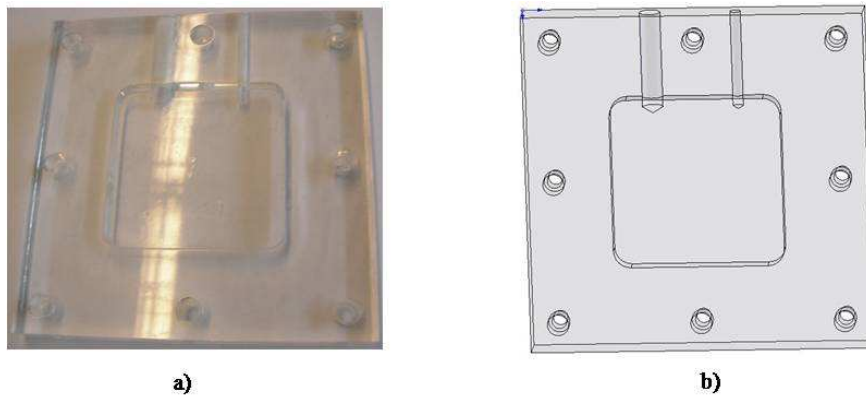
Anode end plate (acrylic) (a) photograph, (b) 3D CAD drawing.
